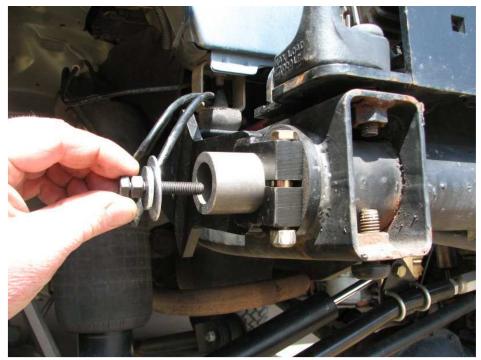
Slide the spacer over the inner torsion bar as shown, assemble washers and nut and bolt as shown.
